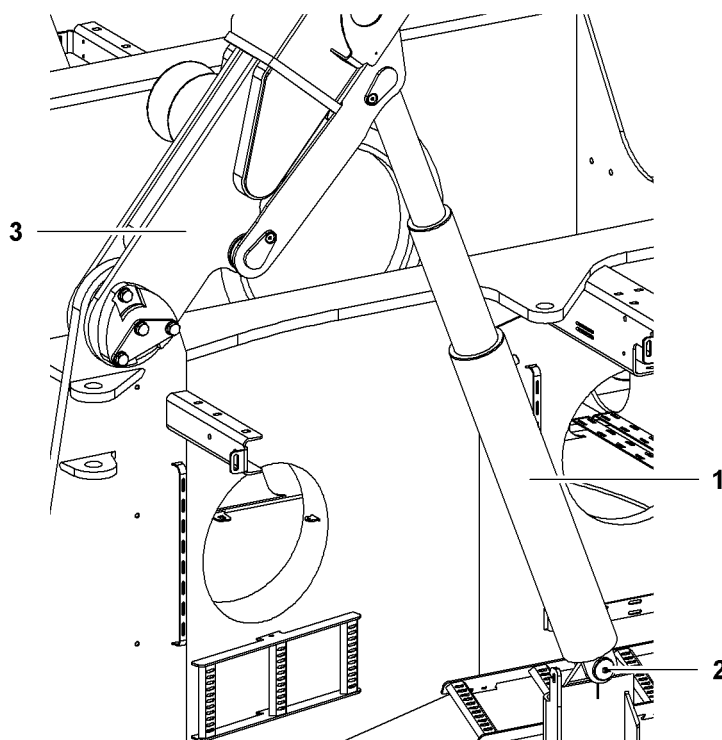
Lubricating the bearings on the A-frame cylinder
